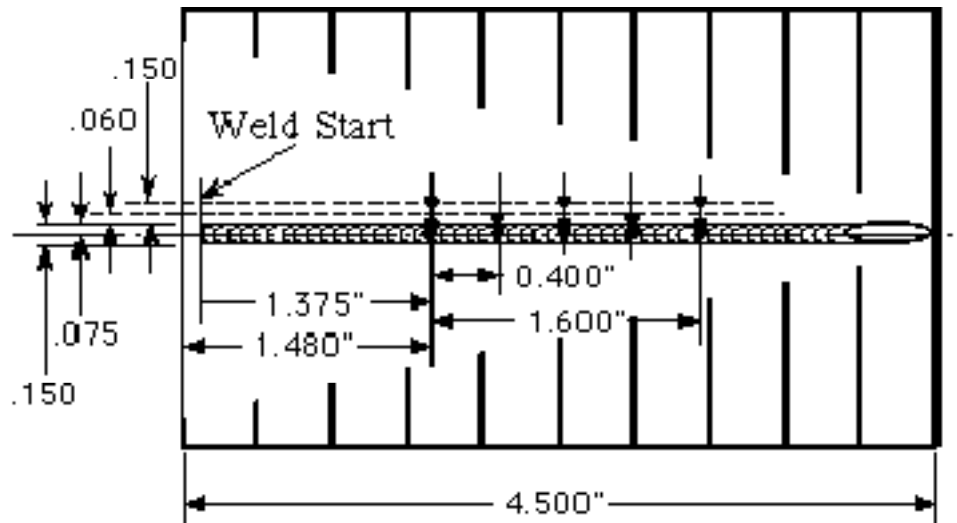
Schematic of Houldcroft solidification cracking specimen made from 0.050 inch thick sheet. Also noted on specimen is location of thermocouple placements.
